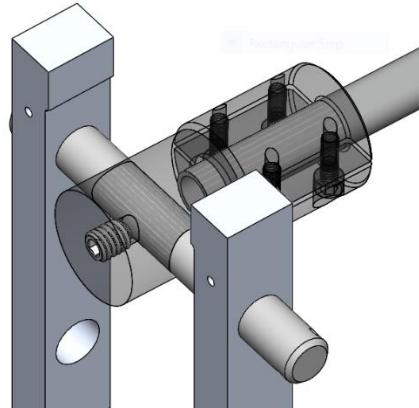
Transparent view of set screw from boom shaft end mounting onto top clevis pin Figure 40
